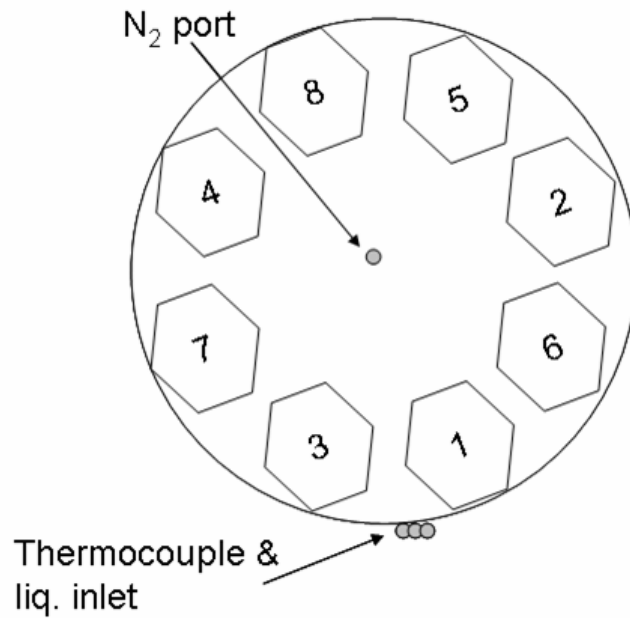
Position numbering for bolts, nuts and torque closure.
